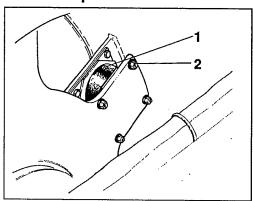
Drum 1 Rubber element 2 Fastening bolts
